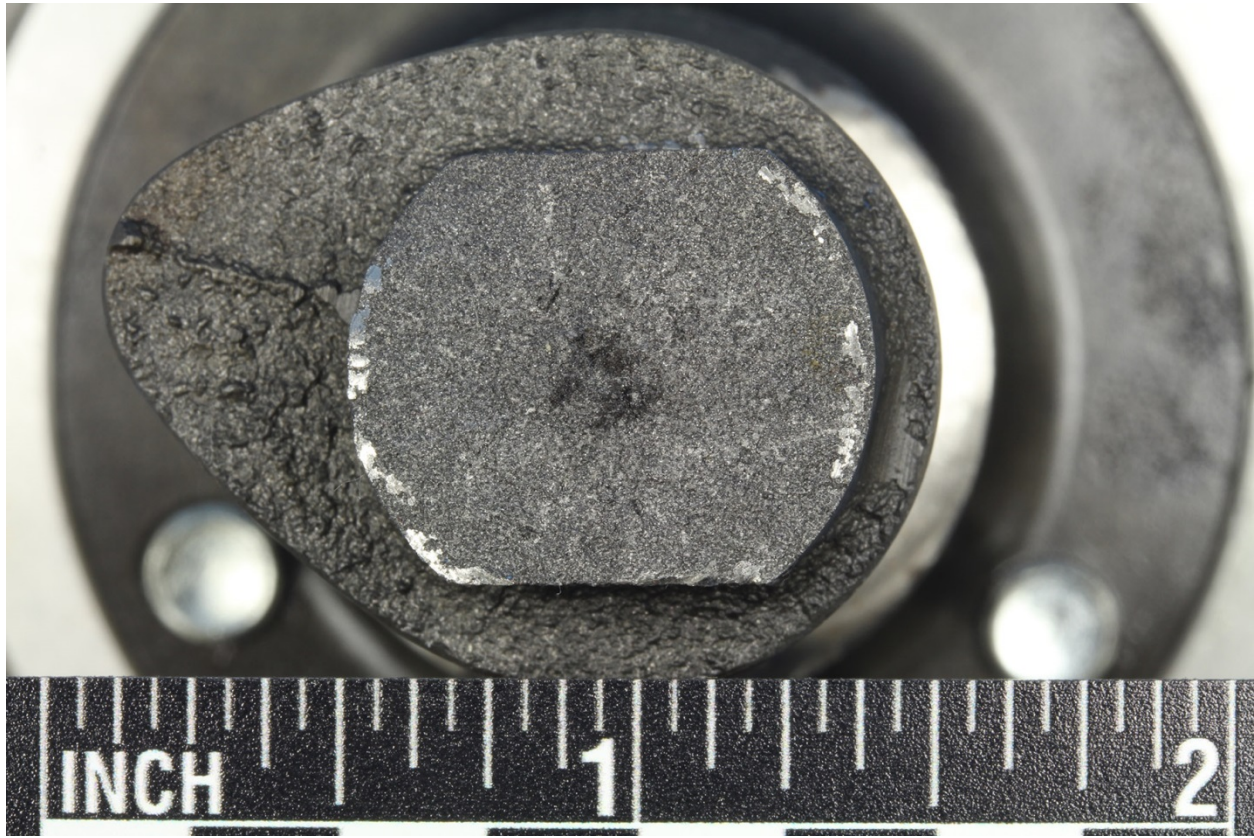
Image of the fracture through the camshaft forward of the number 1 lobe.
